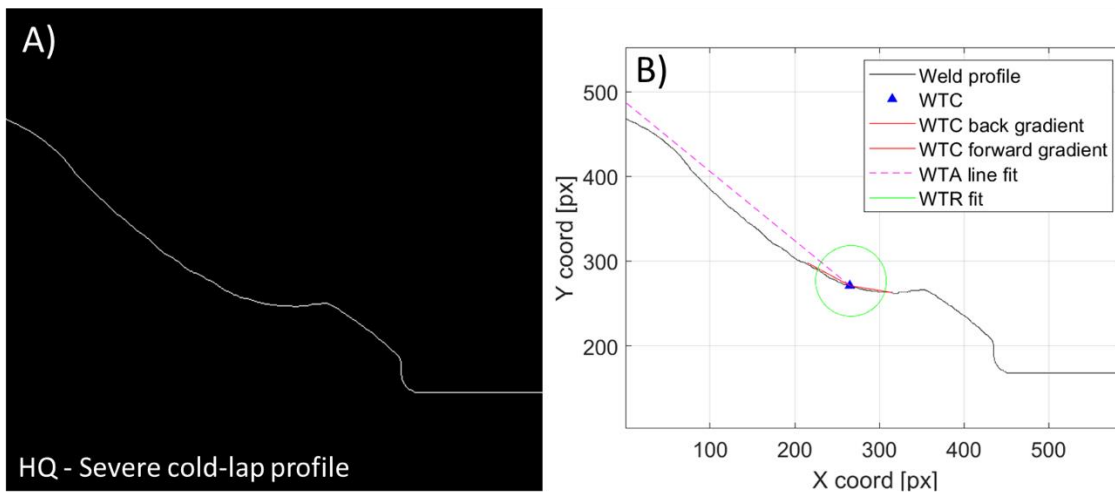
HQ weld profile with severe cold-lap defect - A) original single-pixel weld profile; B) weld toe geometry extraction after MATLAB processing.
